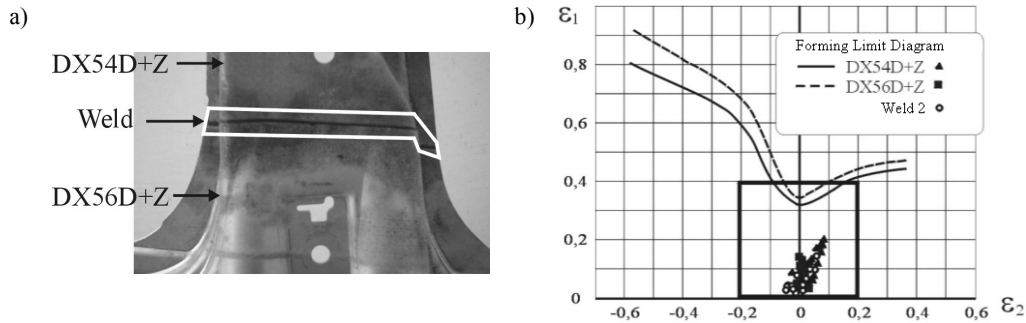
Photography of weld 2 with marked area of local strain measurements (a), distribution of local strain according to Forming Limit Diagram of joined sheets of b-pillar drawpiece
